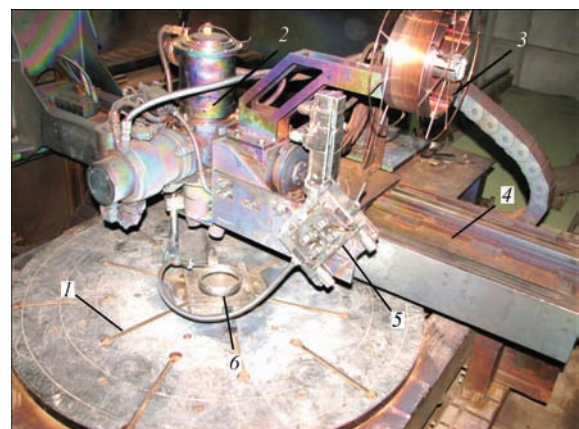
Arrangement of equipment for surfacing using wire in vacuum chamber
